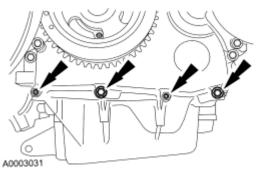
Locating Engine Front Cover-To-Oil Pan Bolts Courtesy of FORD MOTOR CO.
